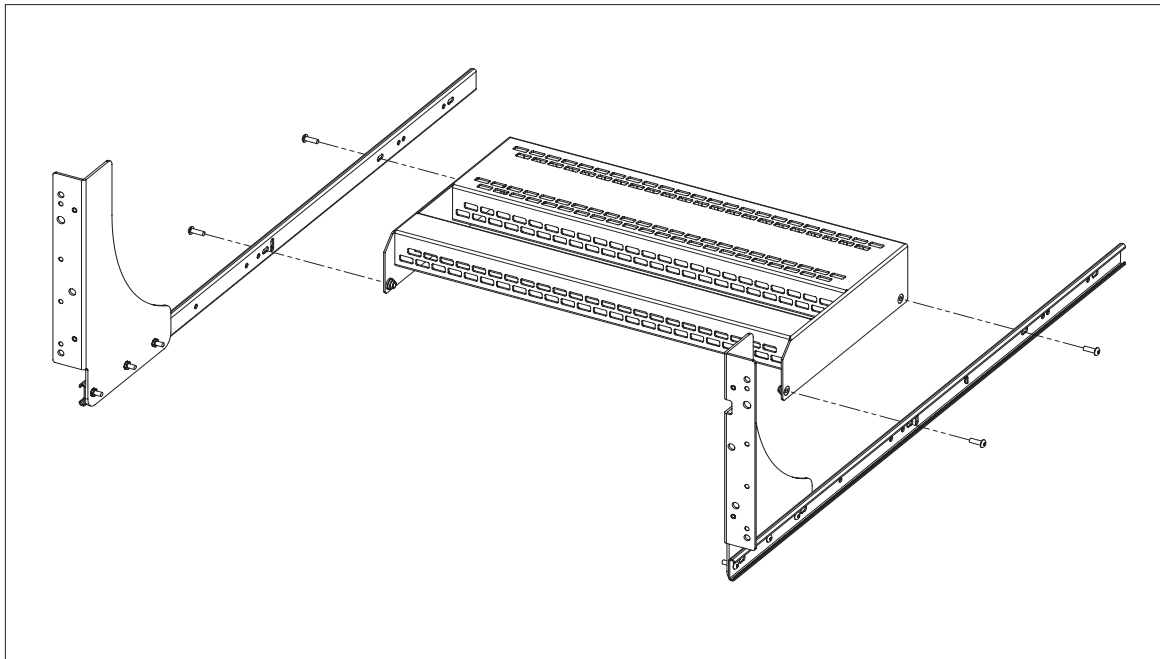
Figure A. The angled side of the cable tray should face the G18 receiver, and with shorter slide kits the cable tray will sit below the lip of the instrument brackets.
